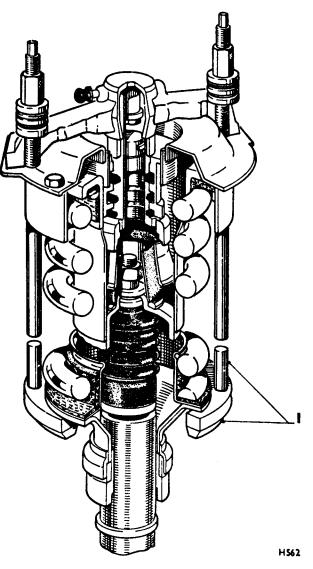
SPRING COMPRESSING TOOL IN POSITION
